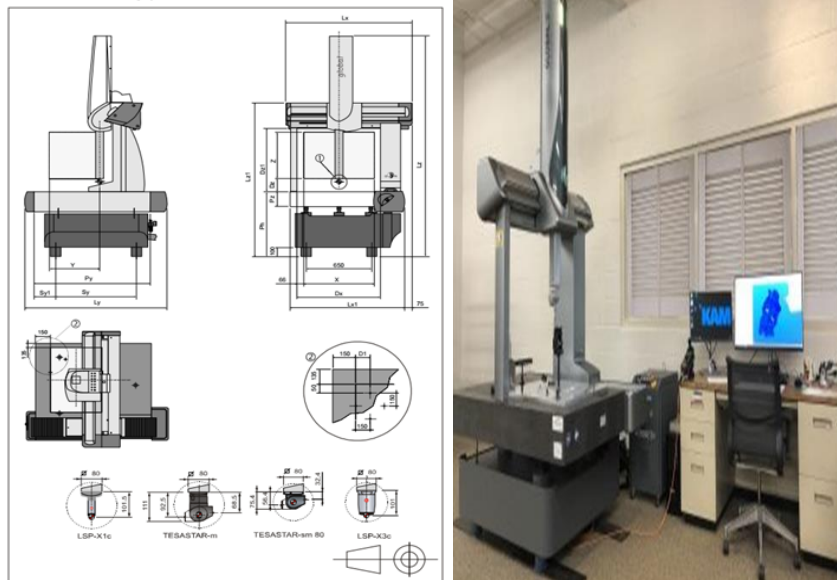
a) Dimensions of the Hexagon Global S machine, b) appearance of the measuring machine in real space
